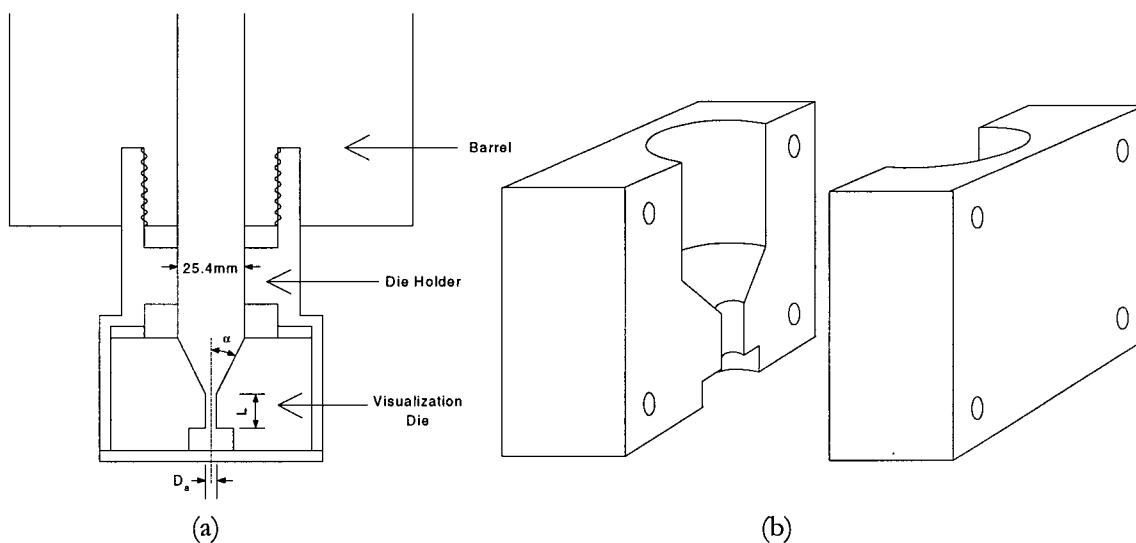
(a) Die assembly for the 25.4 mm diameter capillary rheometer, (b) visualization die design.
